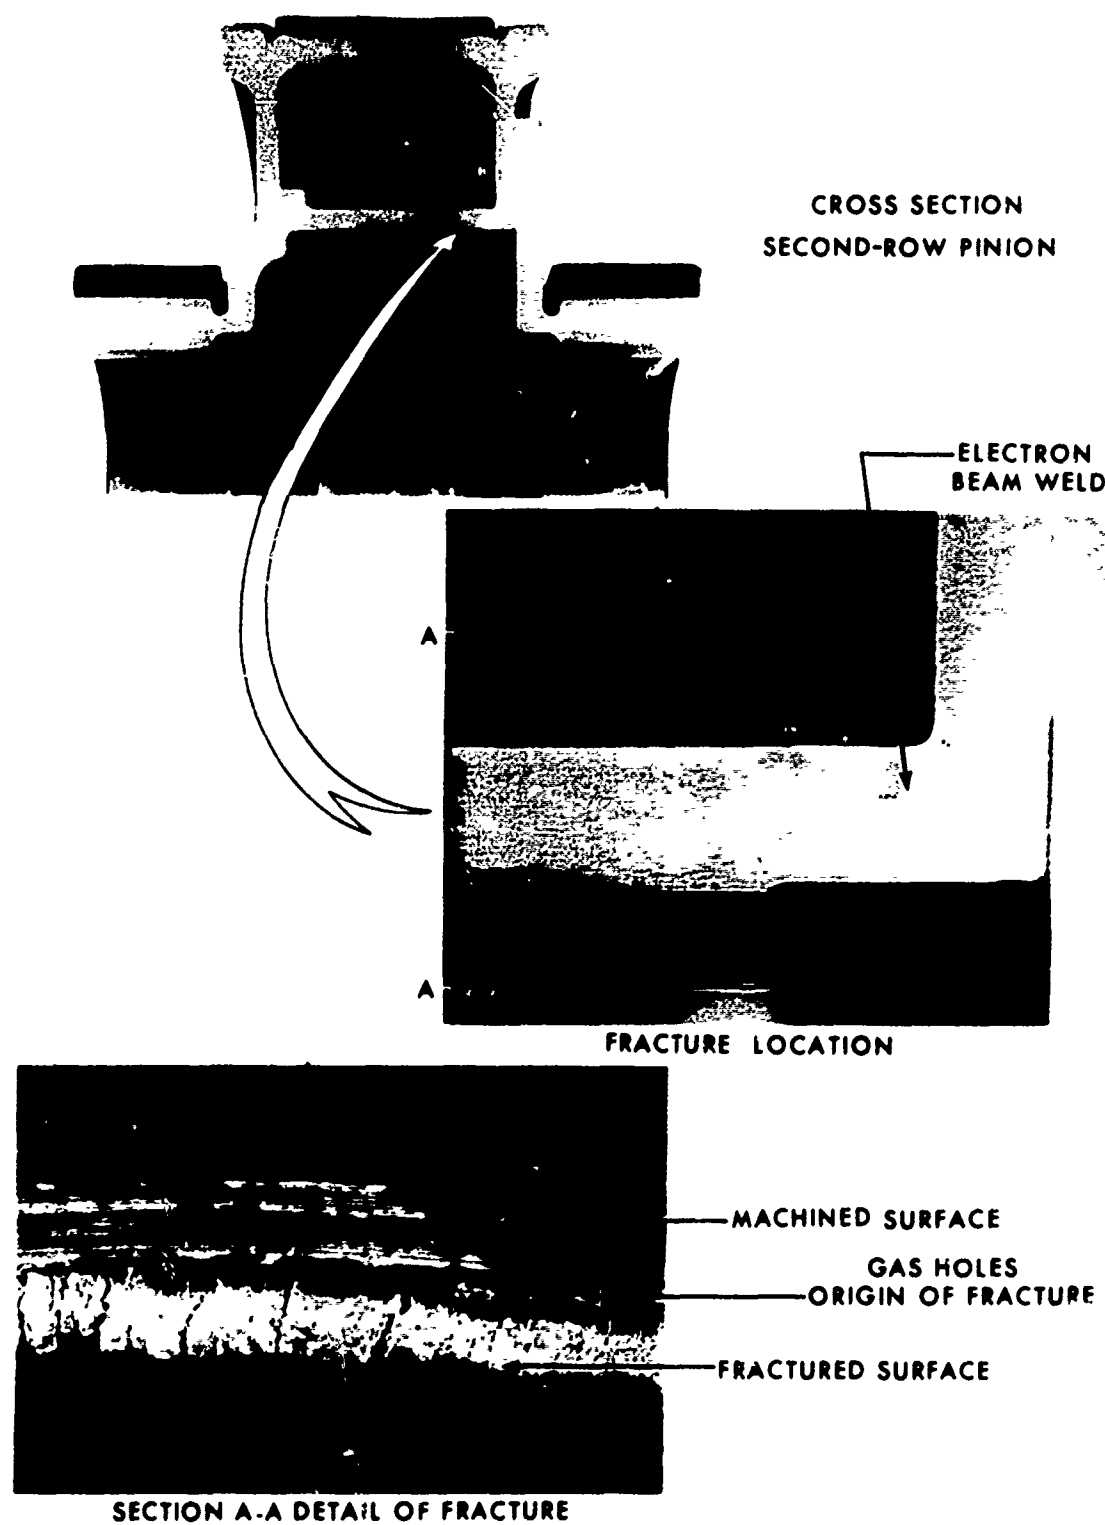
Primary Fracture, Second-Row Gear, S/N 62
